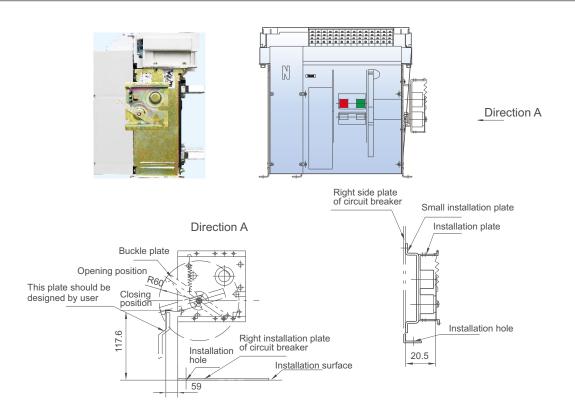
NA8G-1600 fixed type circuit breaker status door interlock installation dimensions
